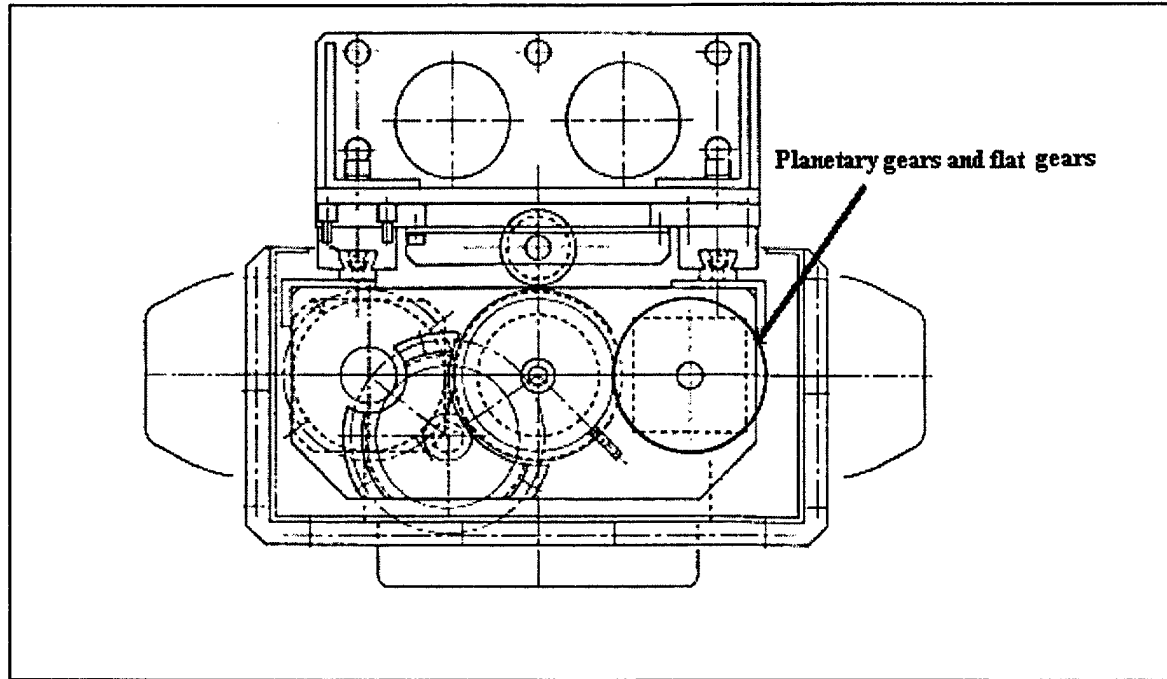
Flat gears in the wheel assembly (transparent view from the top)
